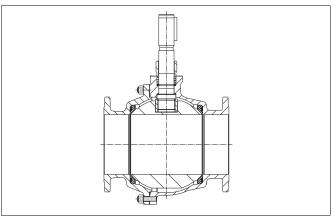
Construction, sizes DN 250/10" and DN 300/12", seat supported ball
